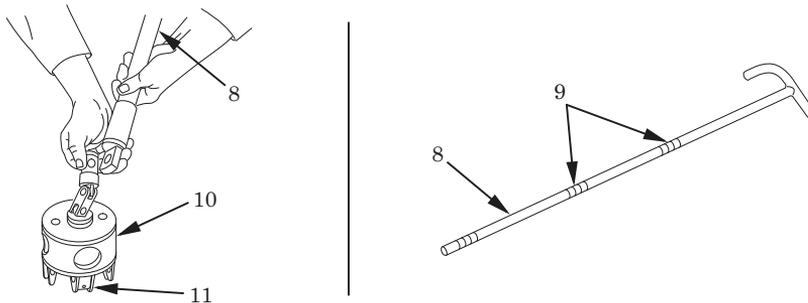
Cartridge Extractor and Artillery Cleaning Staff Assembly.
